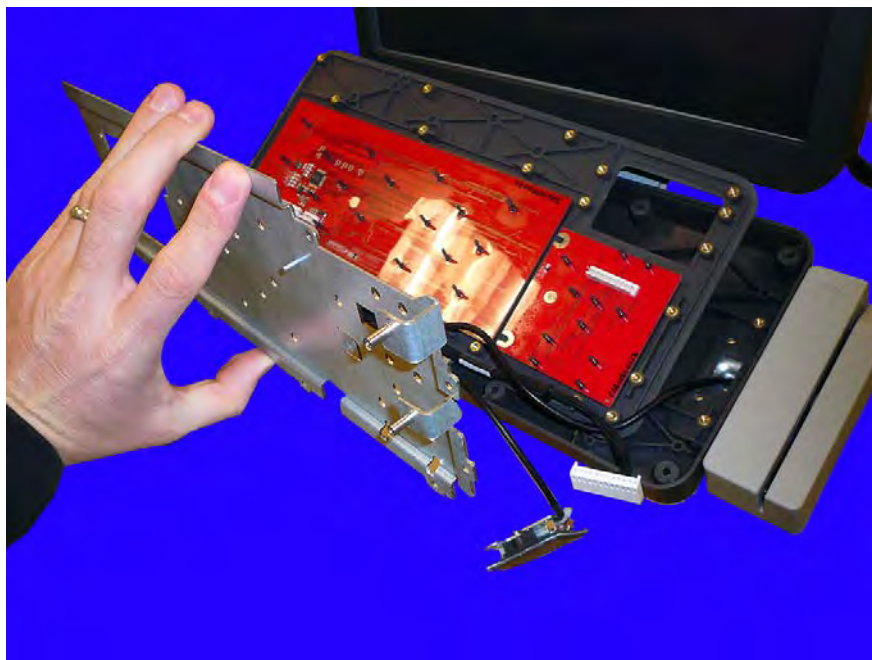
Remove the mounting plate that protects the keypad and keyboard
